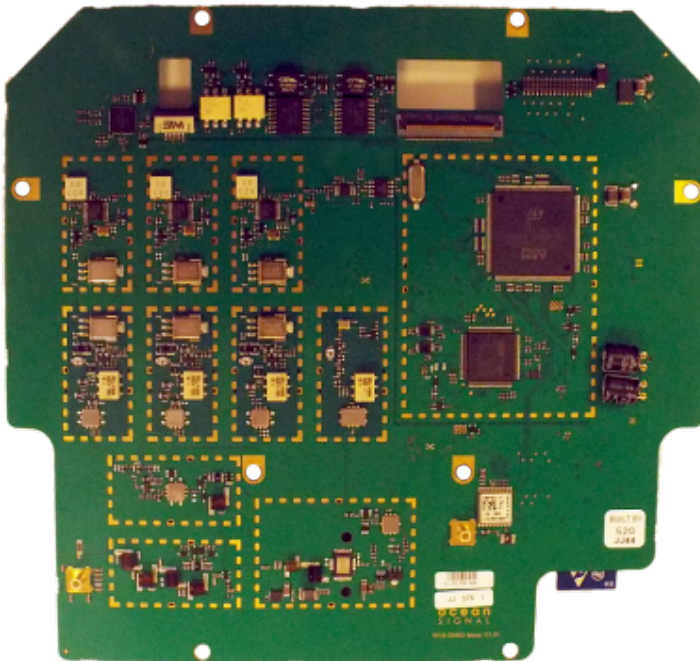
ATA100 Main PCB – Bottom side, screening cans removed
